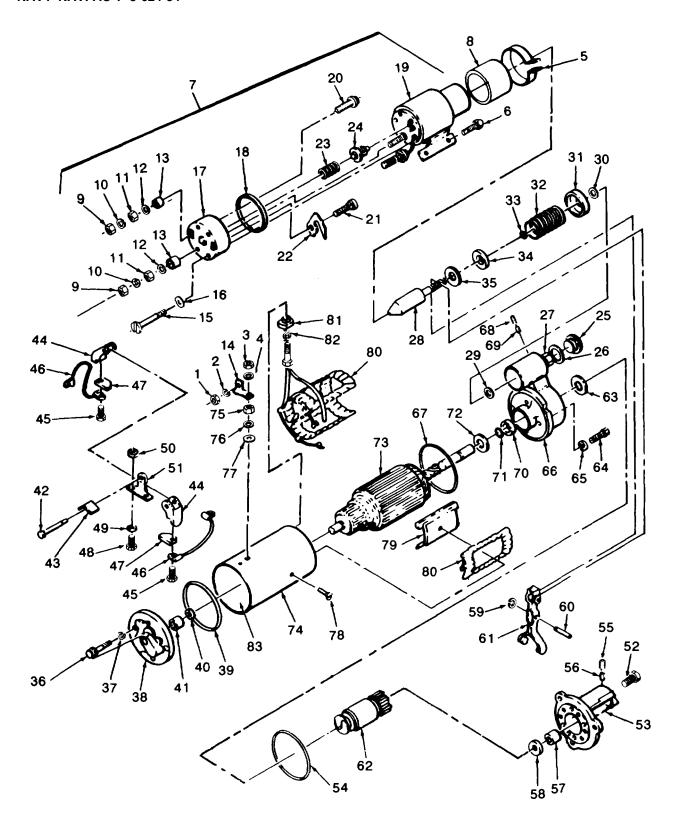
Starter Assembly, Exploded View (Effective with Serial No. RZ60001) (Sheet 1 of 2)
